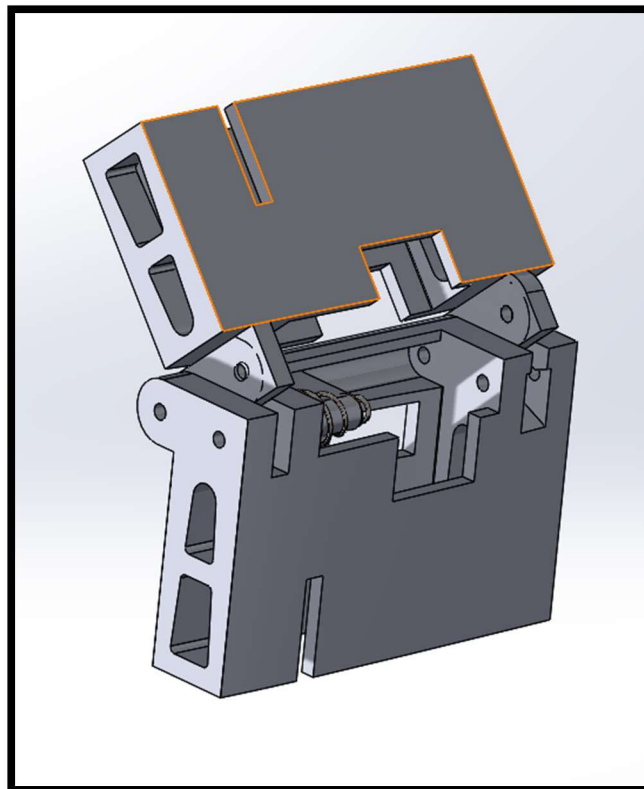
SOLIDWORKS FOR A 3-D PRINTED WING JOINT
